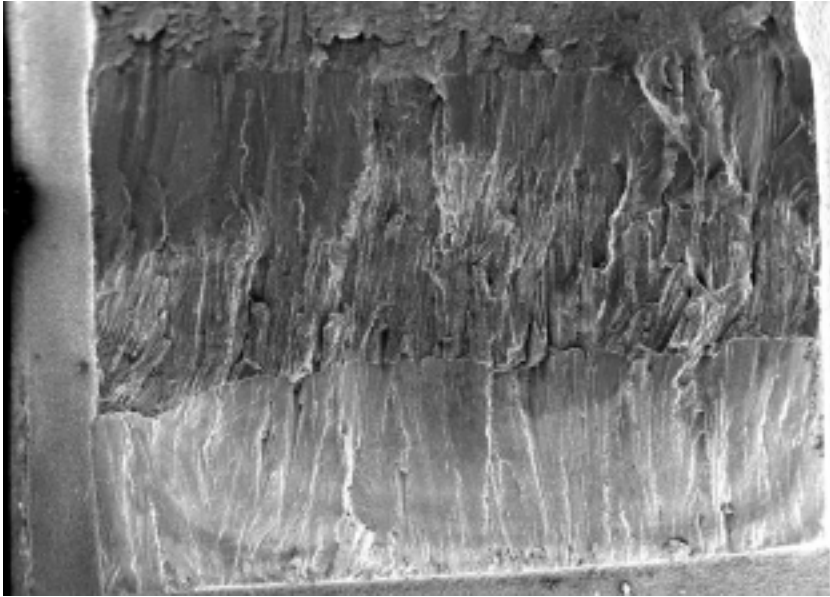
Fracture surface of one of the Alloy 182 specimens showing pre-fatigue crack, crack extension during the test, and post-test fatigue.
